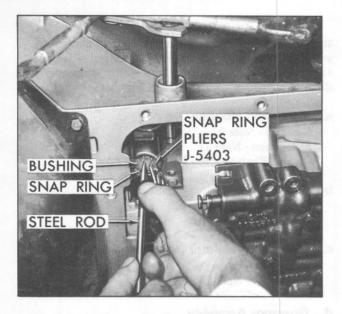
Removing and Installing Pressure Regulator Valve
